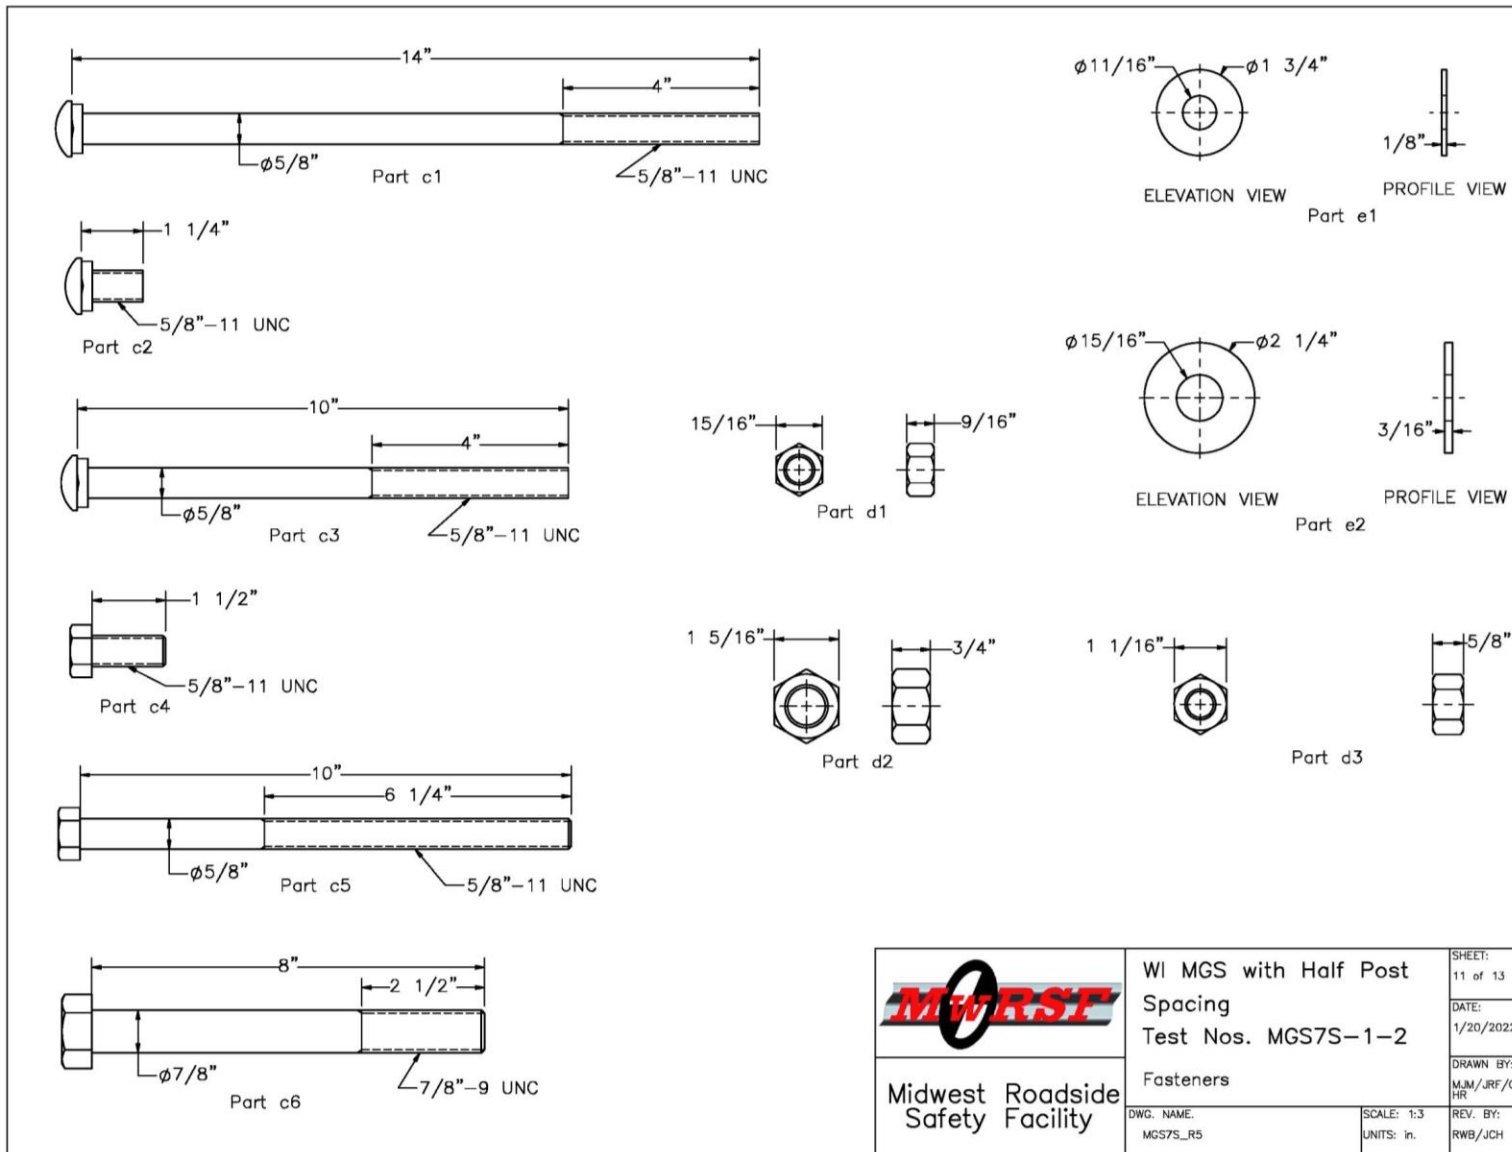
Fasteners, Test Nos. MGS7S-1 and MGS7S-2
